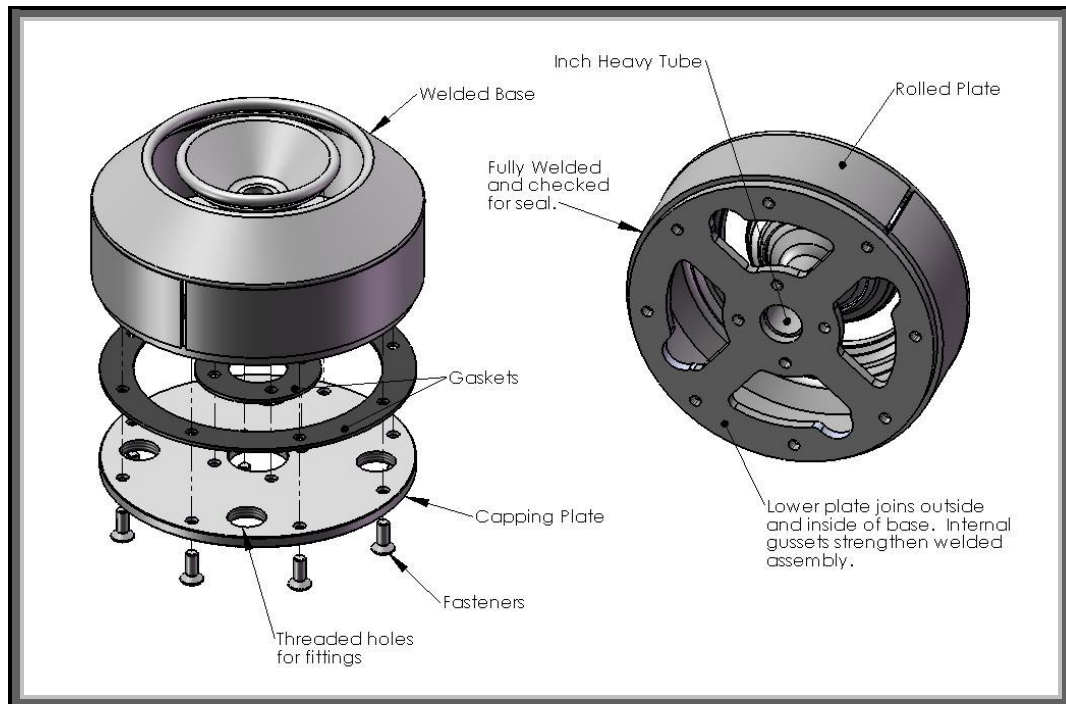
Lower mount manufactured by welding.
